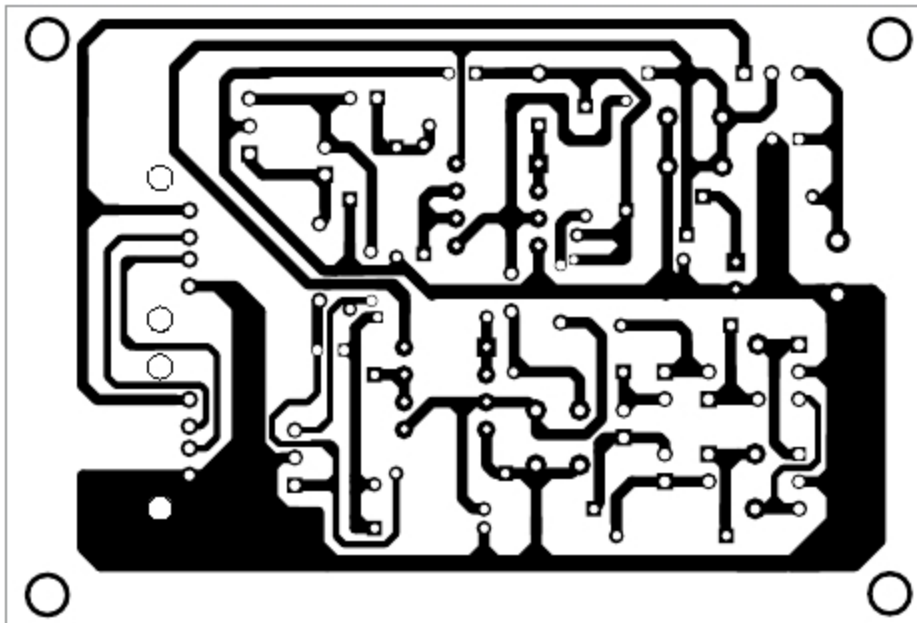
Actual-size PCB layout of configurable audio buffer for headphones
